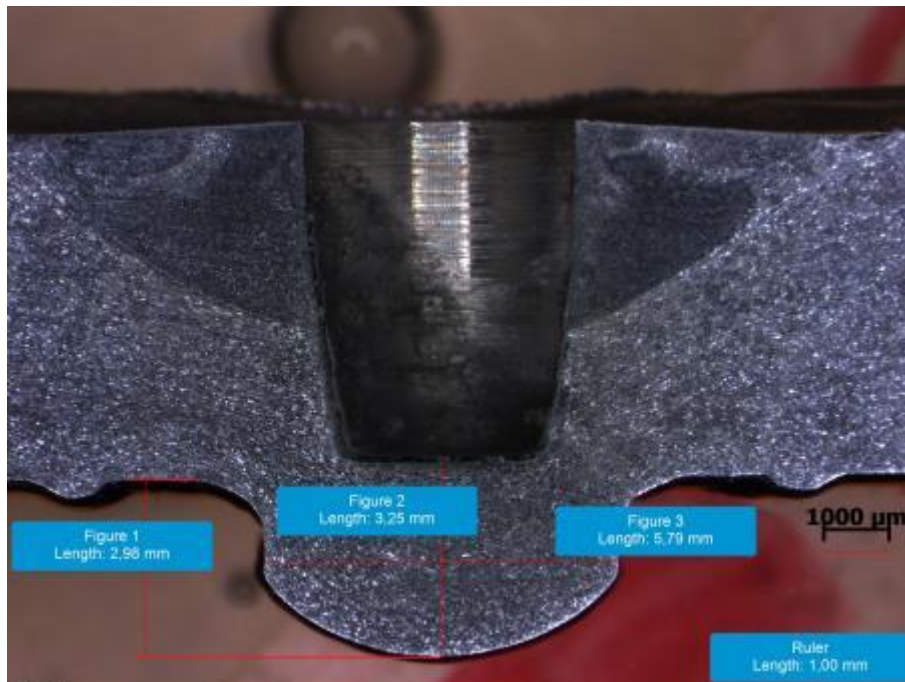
Illustration of measured parameters of welded sample and macrostructure views – 3.5mm plunge depth
